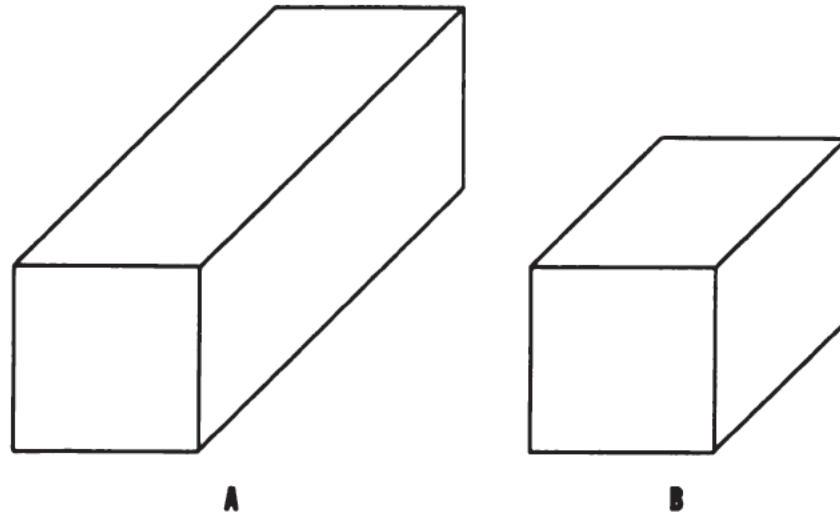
A. Cavalier drawing. B. Cabinet drawing.
